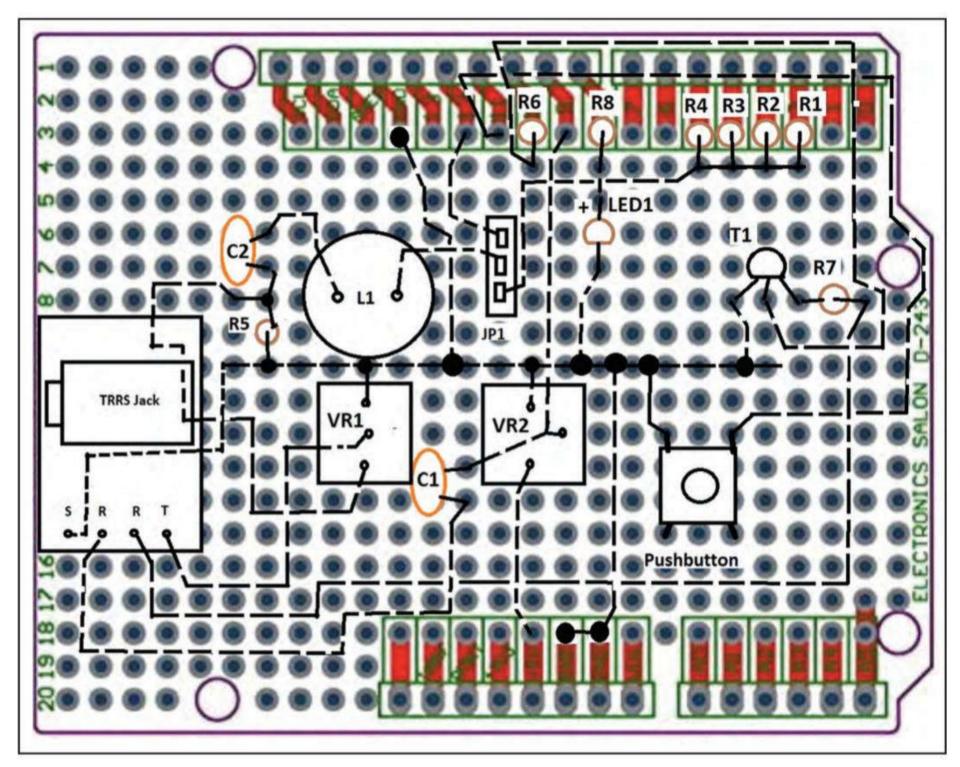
Parts layout and interconnections on Electronics-Salon Prototype PCB.
